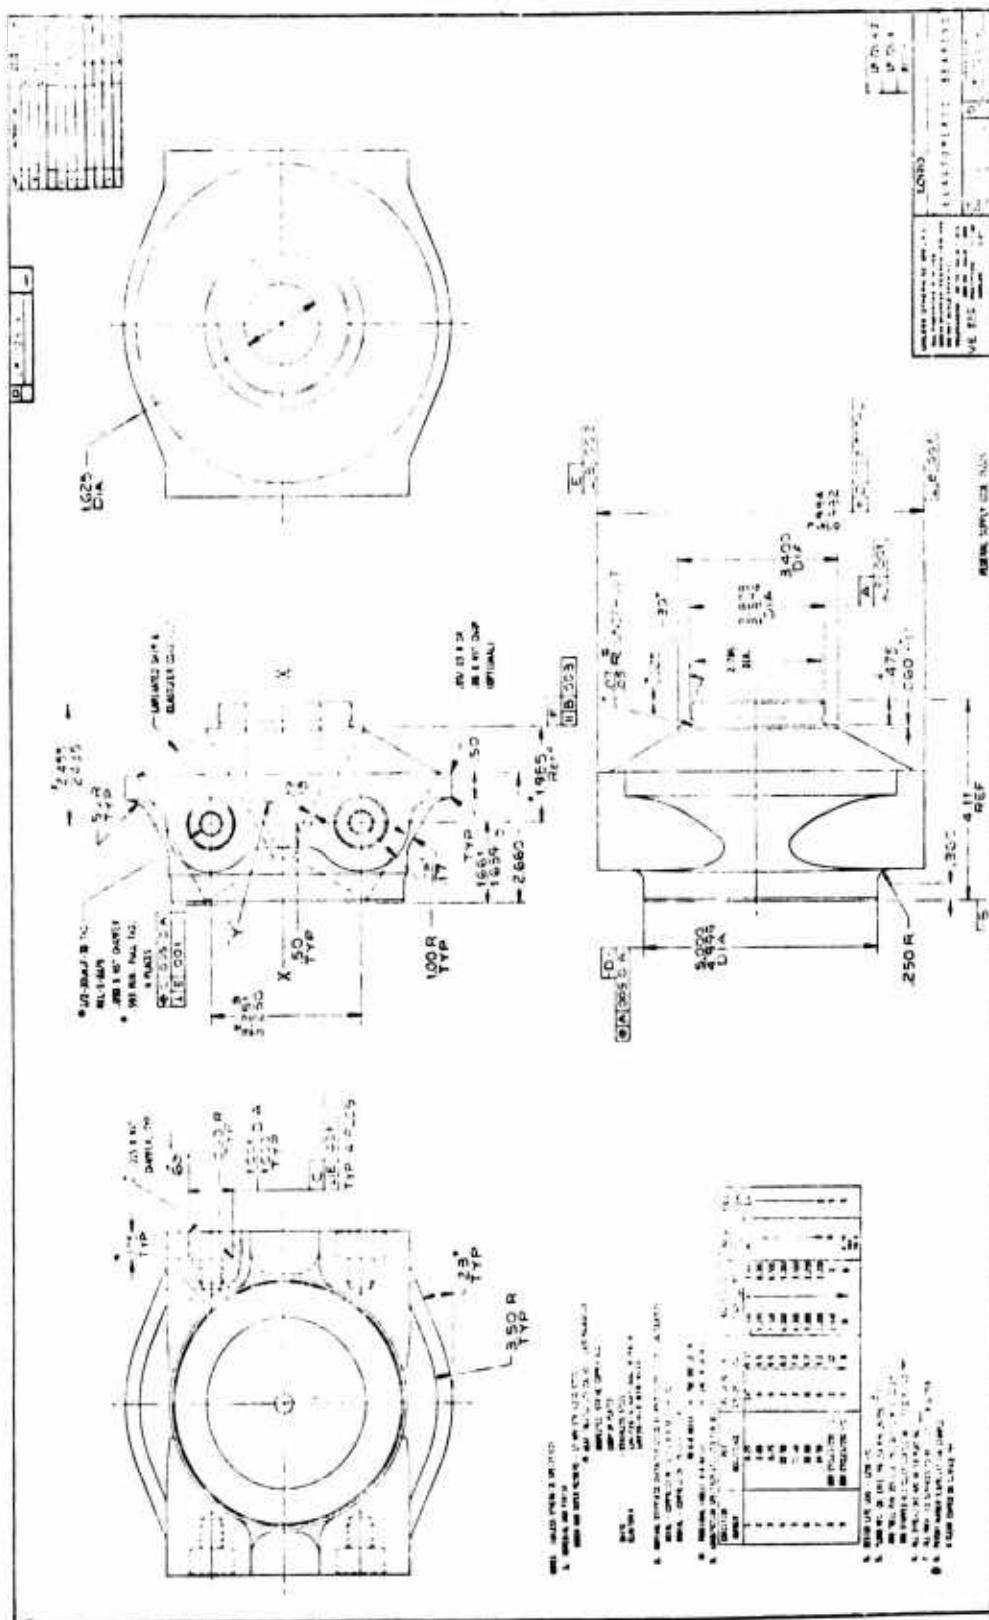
Elastomeric Pitch Change Bearing LM-726-4.
